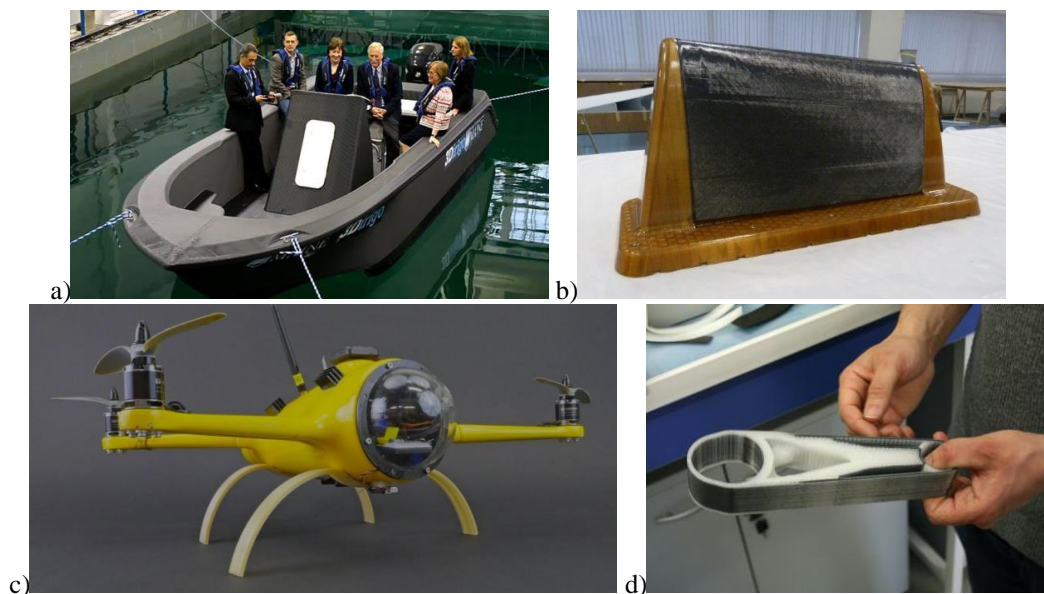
Printed applications made of composites: a) Largest boat (www.compositesmanufacturingmagazine.com); b) Tool for aircraft wings (www.jeccomposites.com); c) Drone landing gear (www.khnum.asia); d) Draping robot for nautical industry (www.boatindustry.com).
